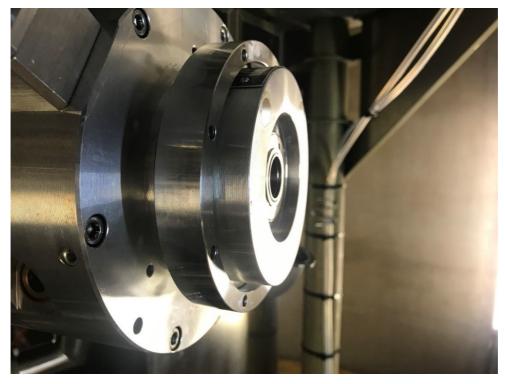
Rear clamp ring of new bearing cap arrangement on gas stripper turbos
